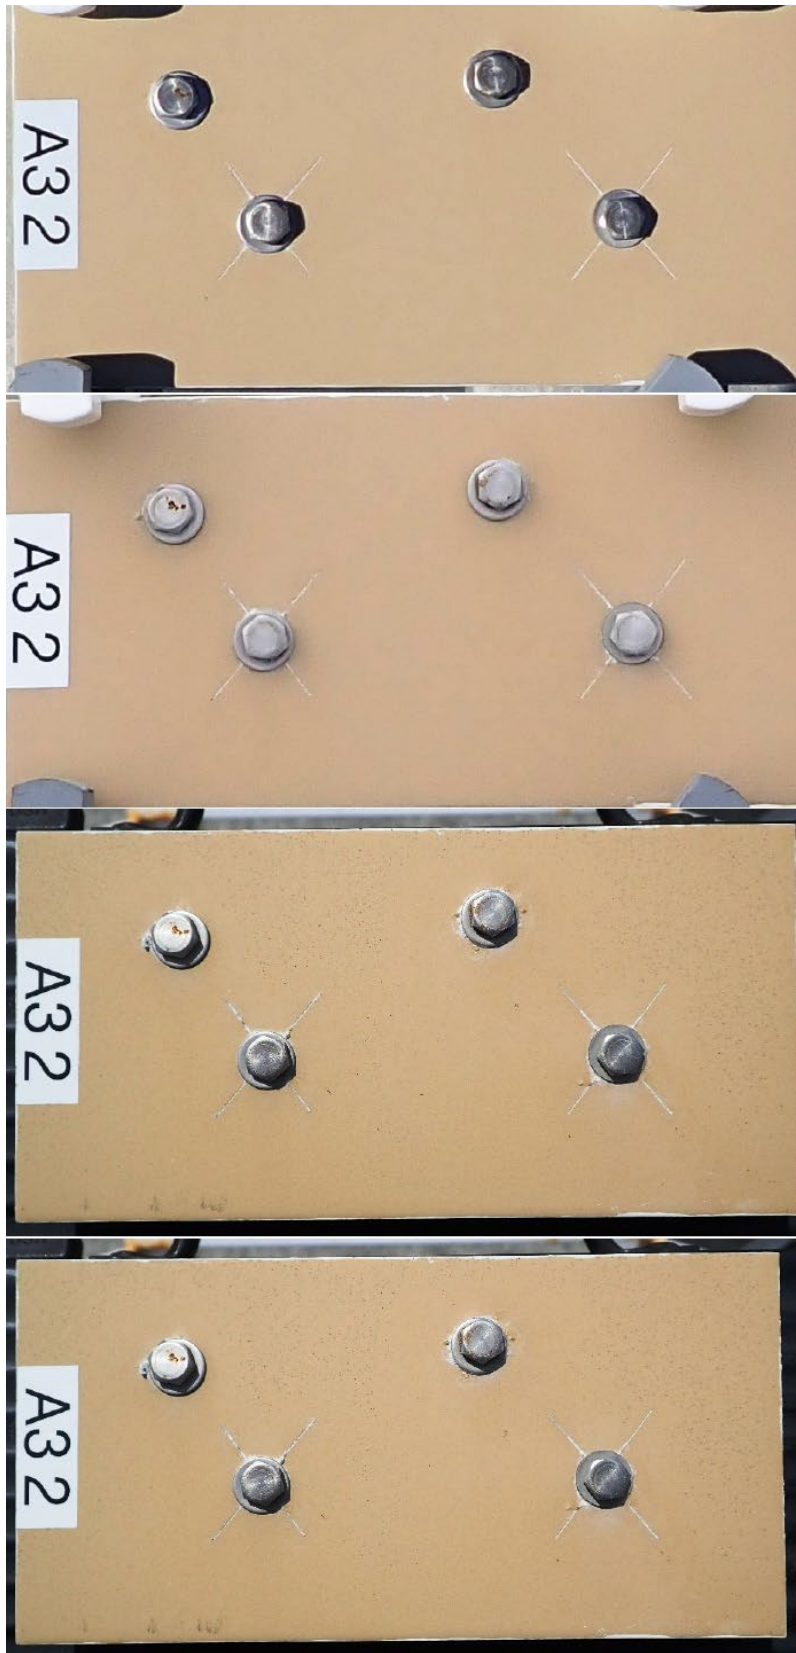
Panel A3-2 top-bottom: 3-, 6-, 9-, and 12-month inspection images
